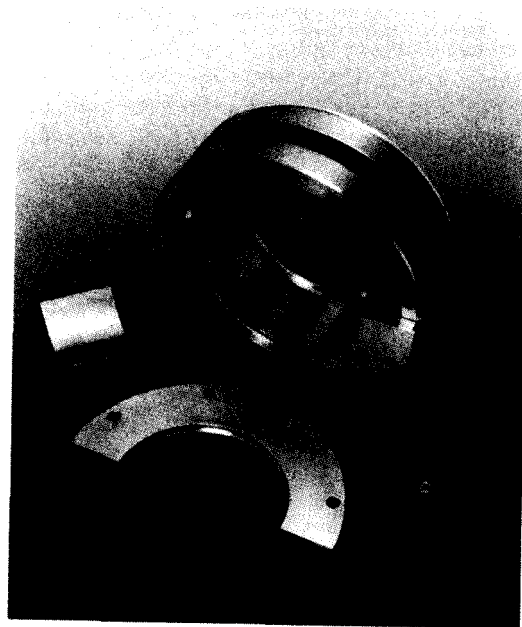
LEG tilting pad five-shoe journal bearing.
